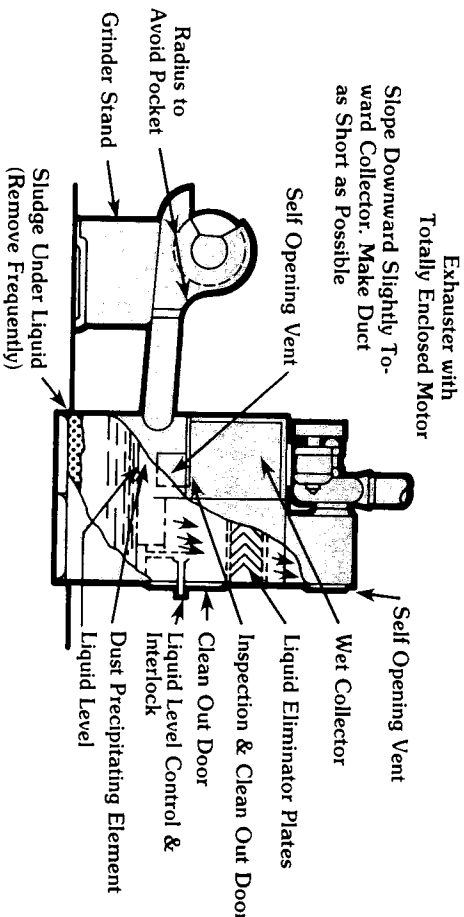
Type of dust collector for use with grinding wheel, belt or disc stands.
